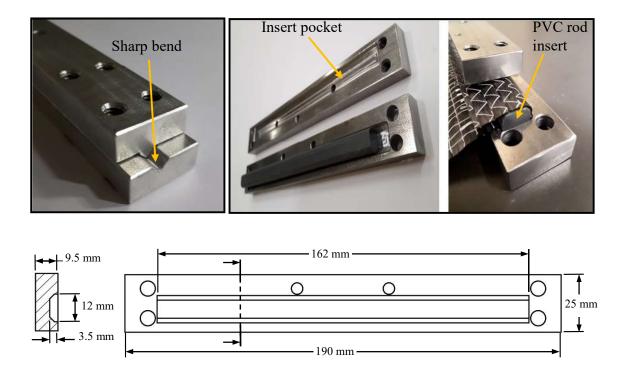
Extension test clamping fixture for unidirectional non-crimp fabrics. (a) Initial clamp design, (b) redesigned clamping fixture with PVC insert and (c) half-symmetry dimensional details of redesigned clamping fixture.
